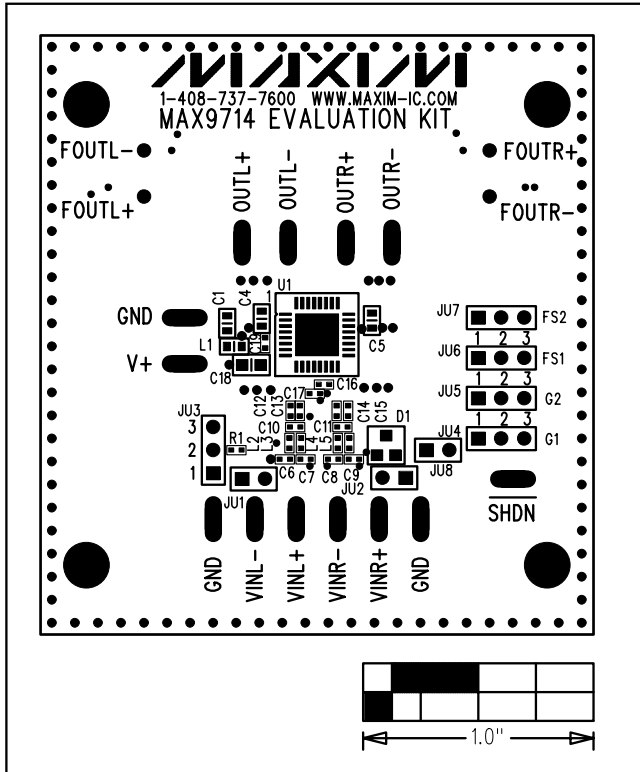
MAX9714 EV Kit Component Placement Guide—Component Side
